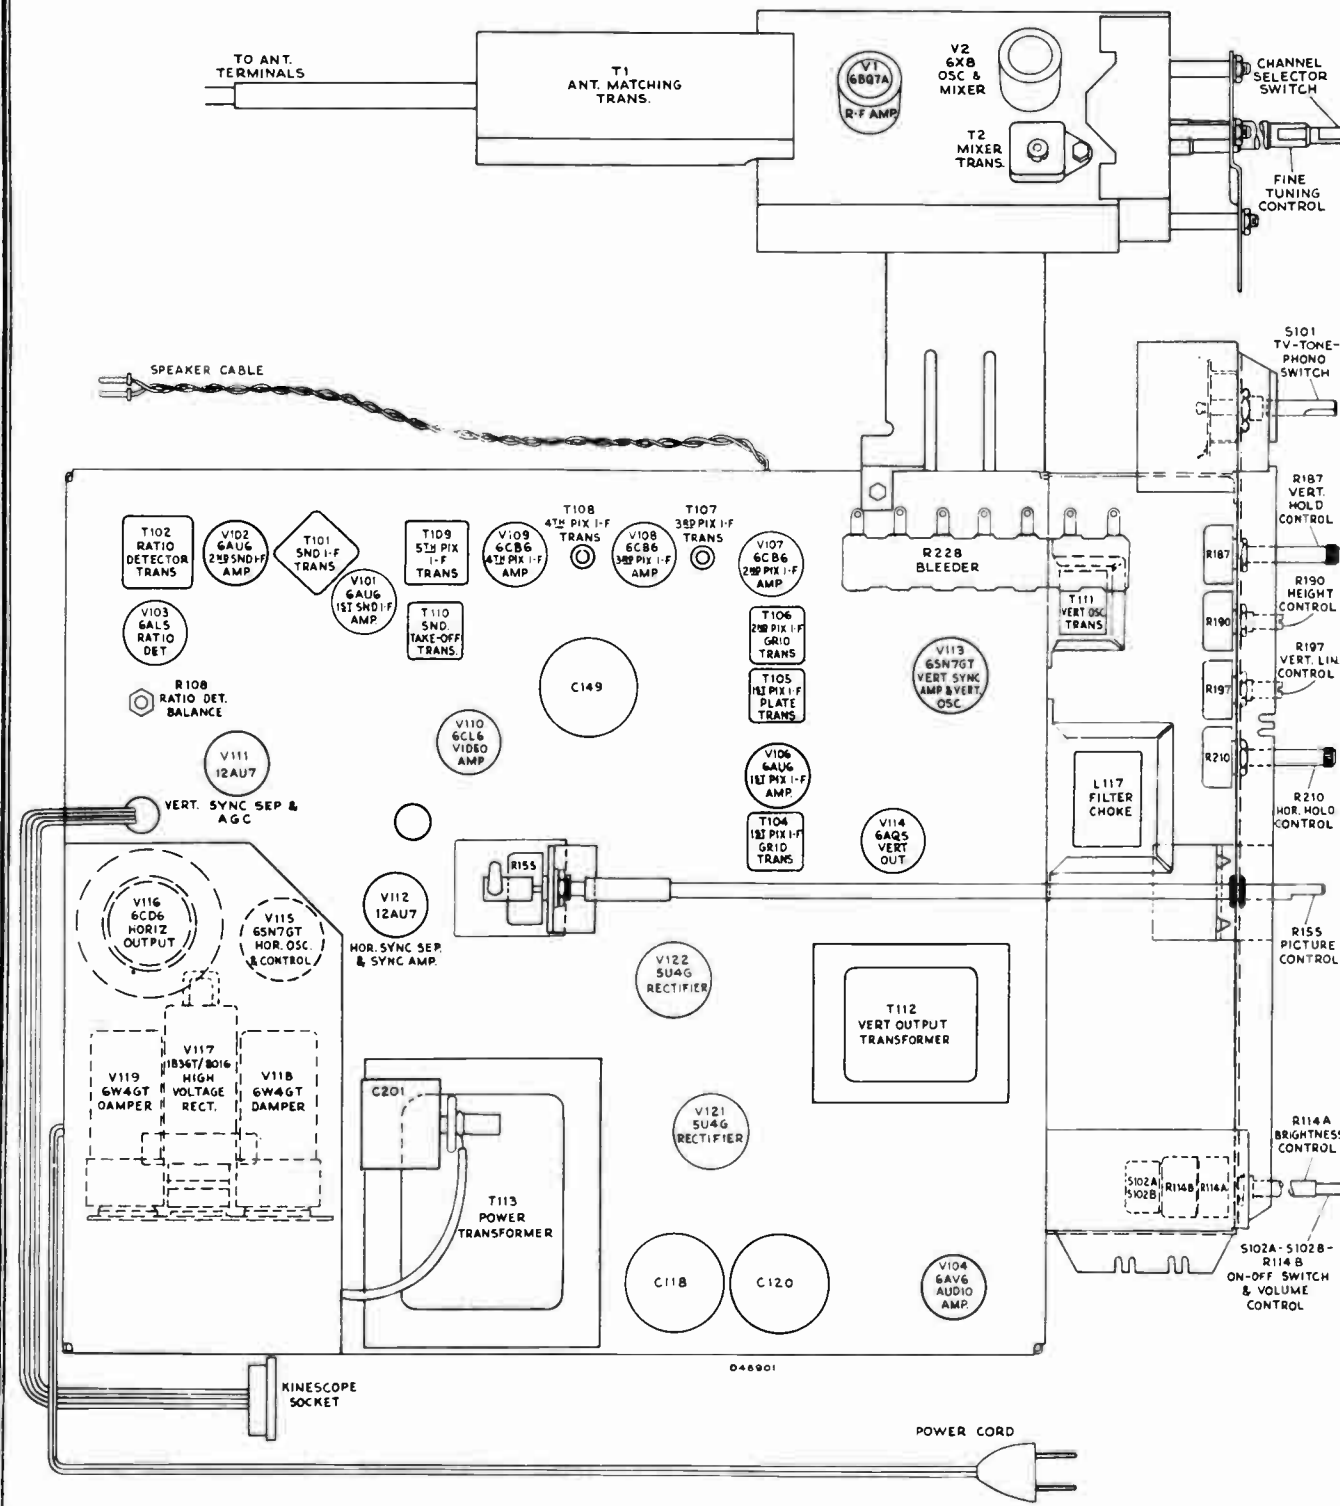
Television Chassis Top View (shown with KRK29 Tuner)
